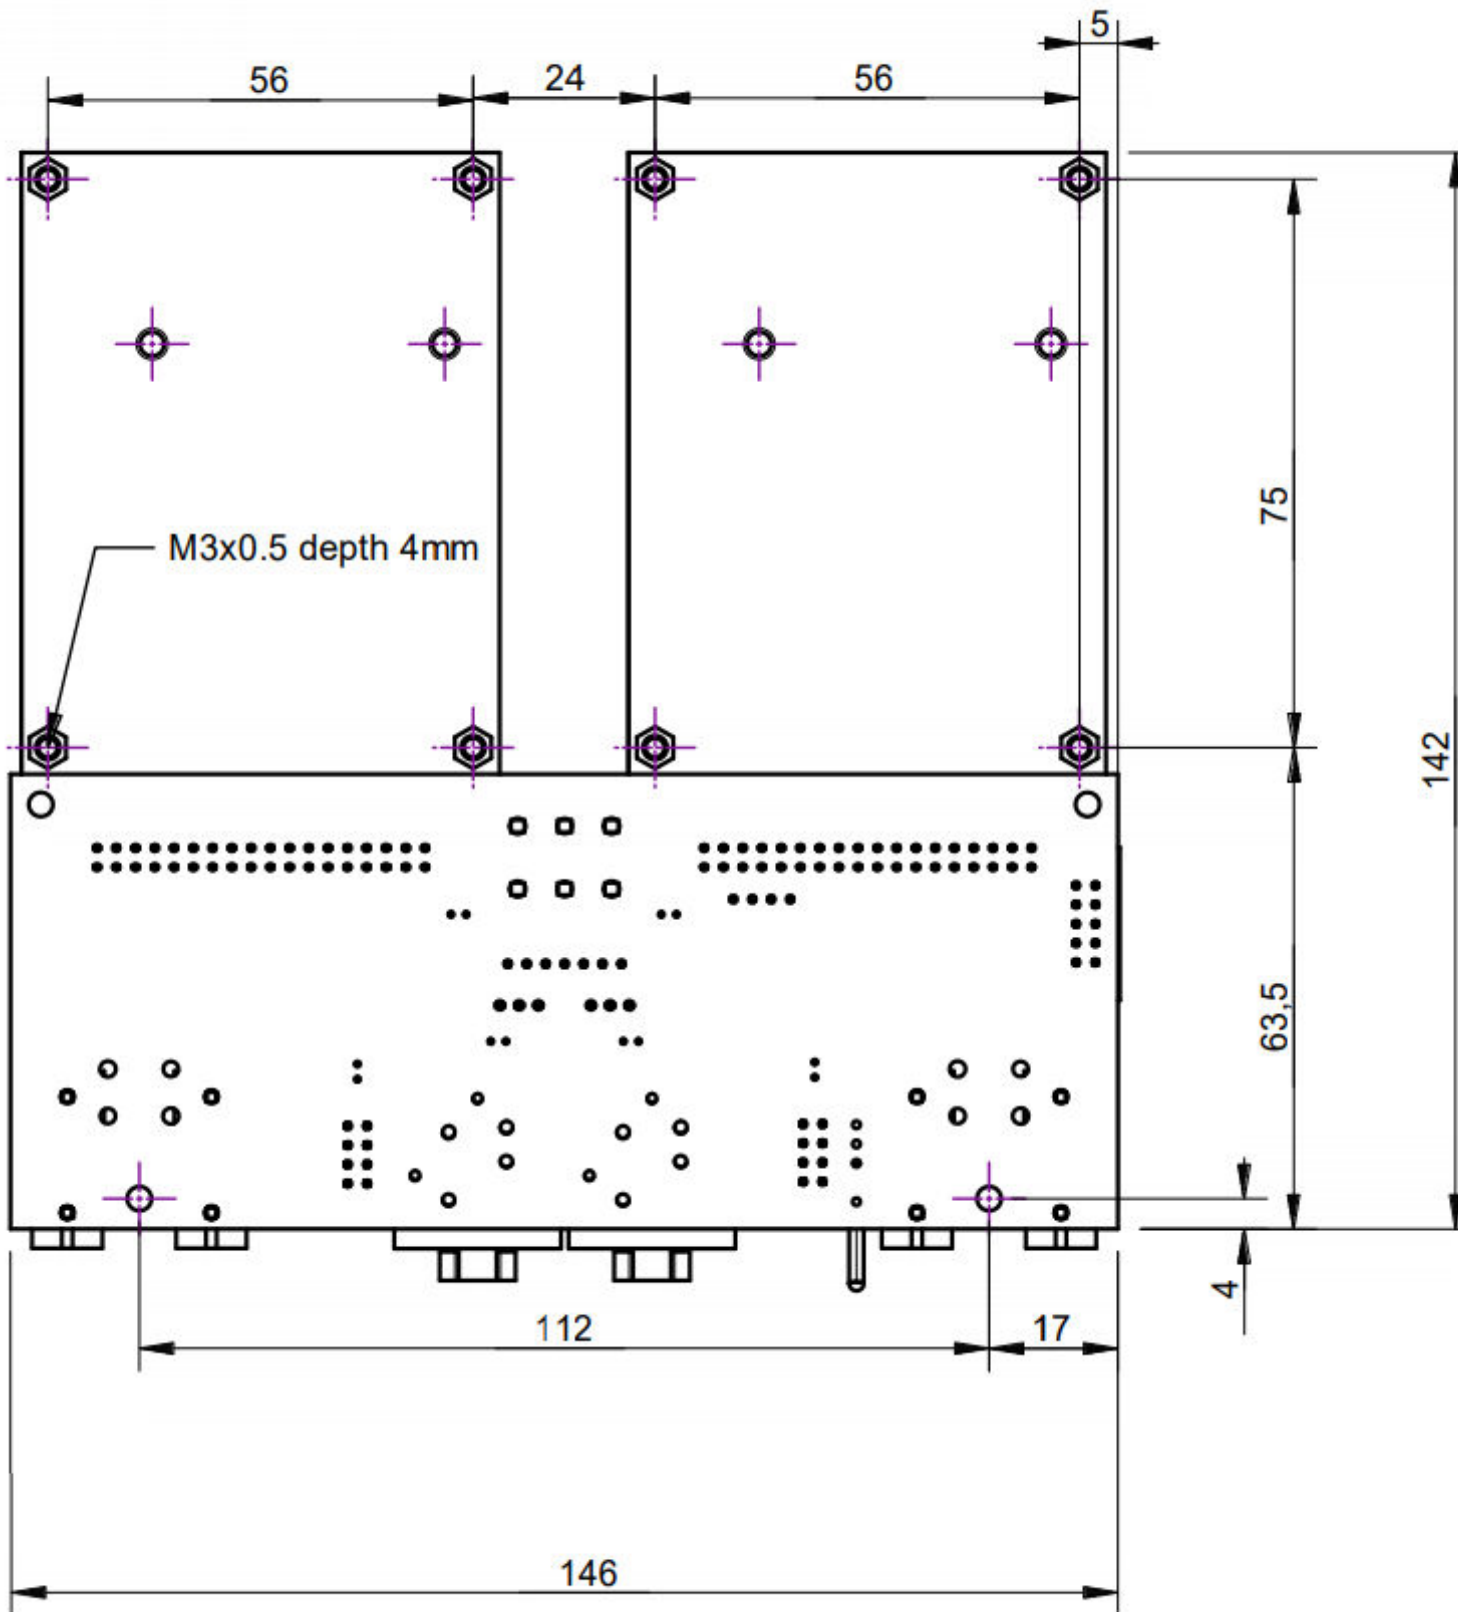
Bottom-side mounting holes (scale 1:1 if printed on A4)
